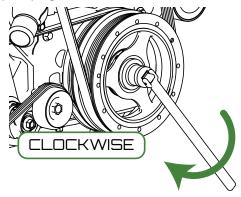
Rotating the Engine Crankshaft with a Breaker Bar
